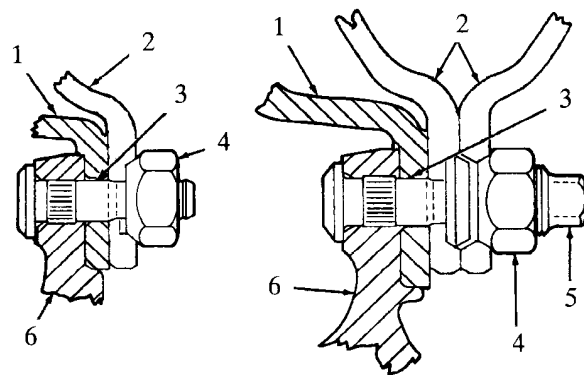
Outboard Mounted Drum With Ball Seat Nuts
